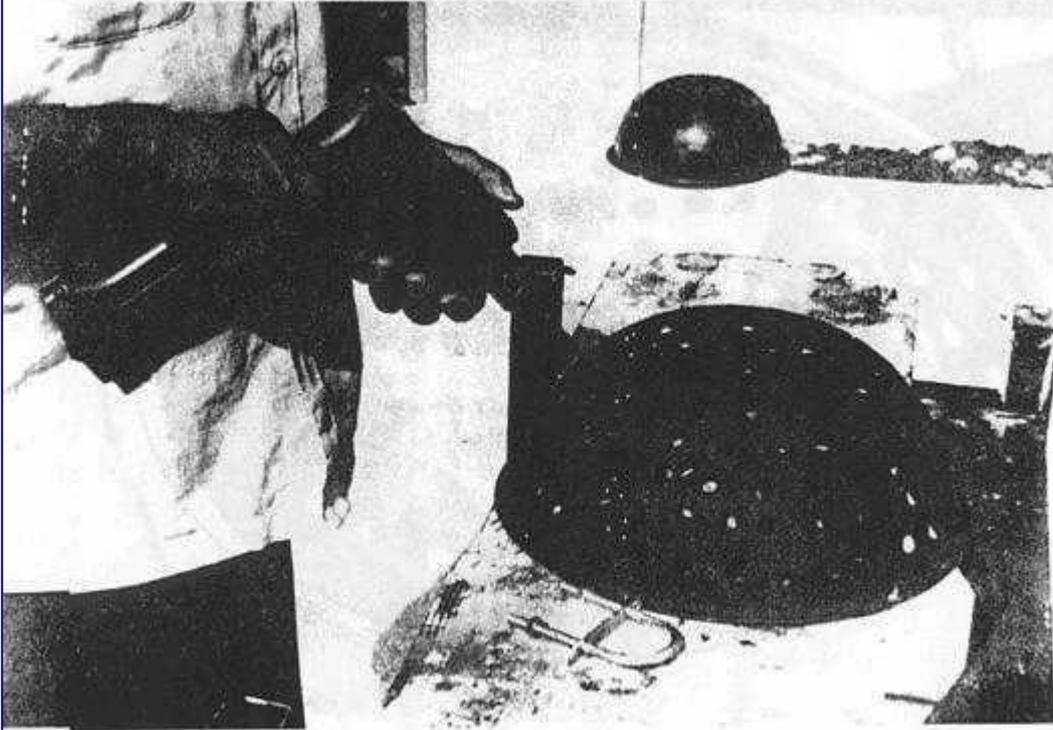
Drilling holes into the stainless steel mixing bowl to be used for the grate. Note the U-bolt in the foreground.
